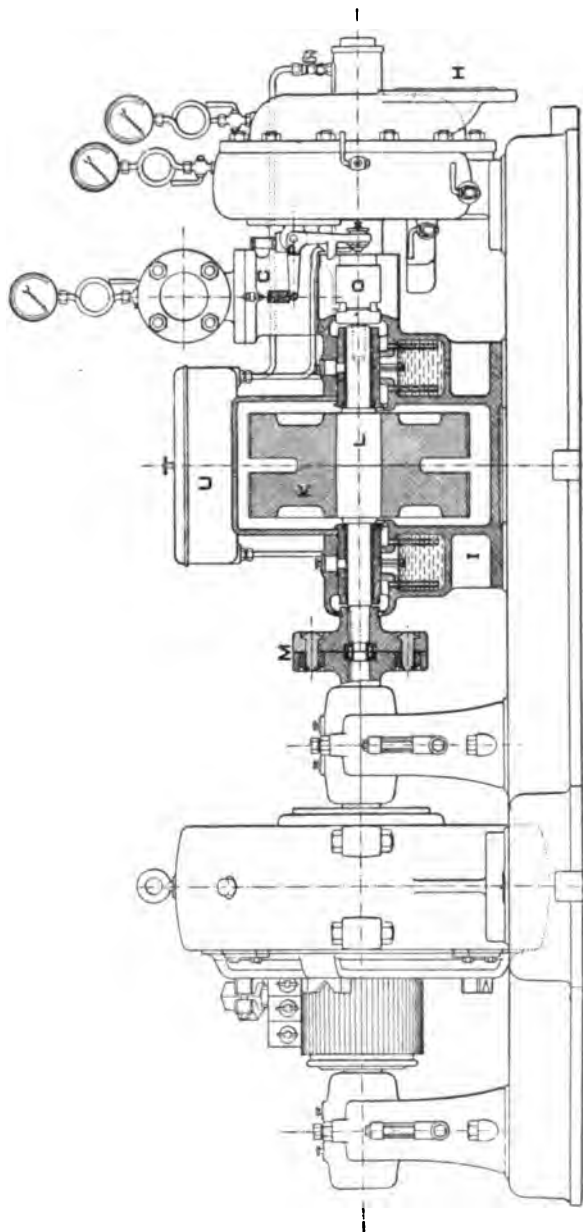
Sectional Elevation of 30 H.P. De Laval Steam Turbine Dynamo.
